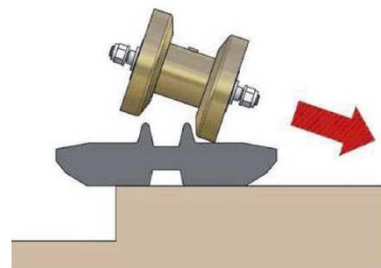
Example of an error in moving the machine (steering) which involves the crawler coming out from its seat
